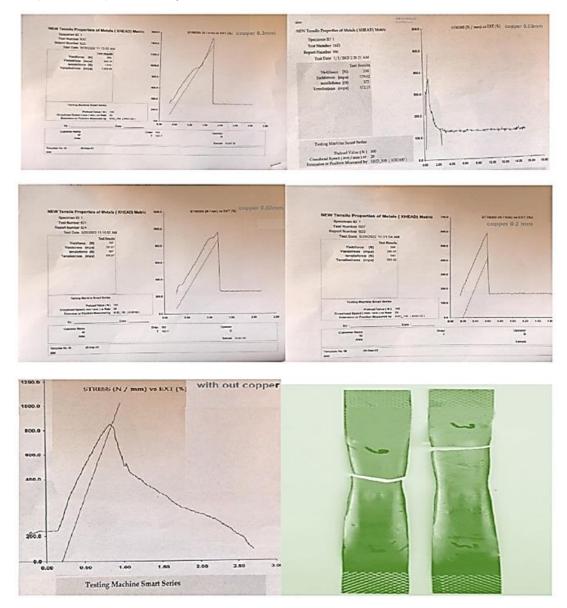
Specimens after shear test without welding and diagram values of shear test with several thicknesses of copper and without.
